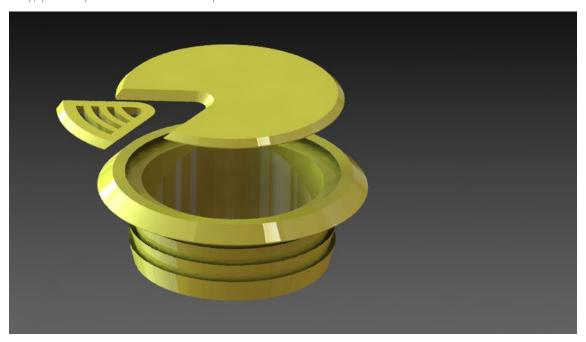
Sample exploded assembly of grommet case, removable top, and adjustable cable plug. Assembly of the product should be made just by simple pushing parts into place:
